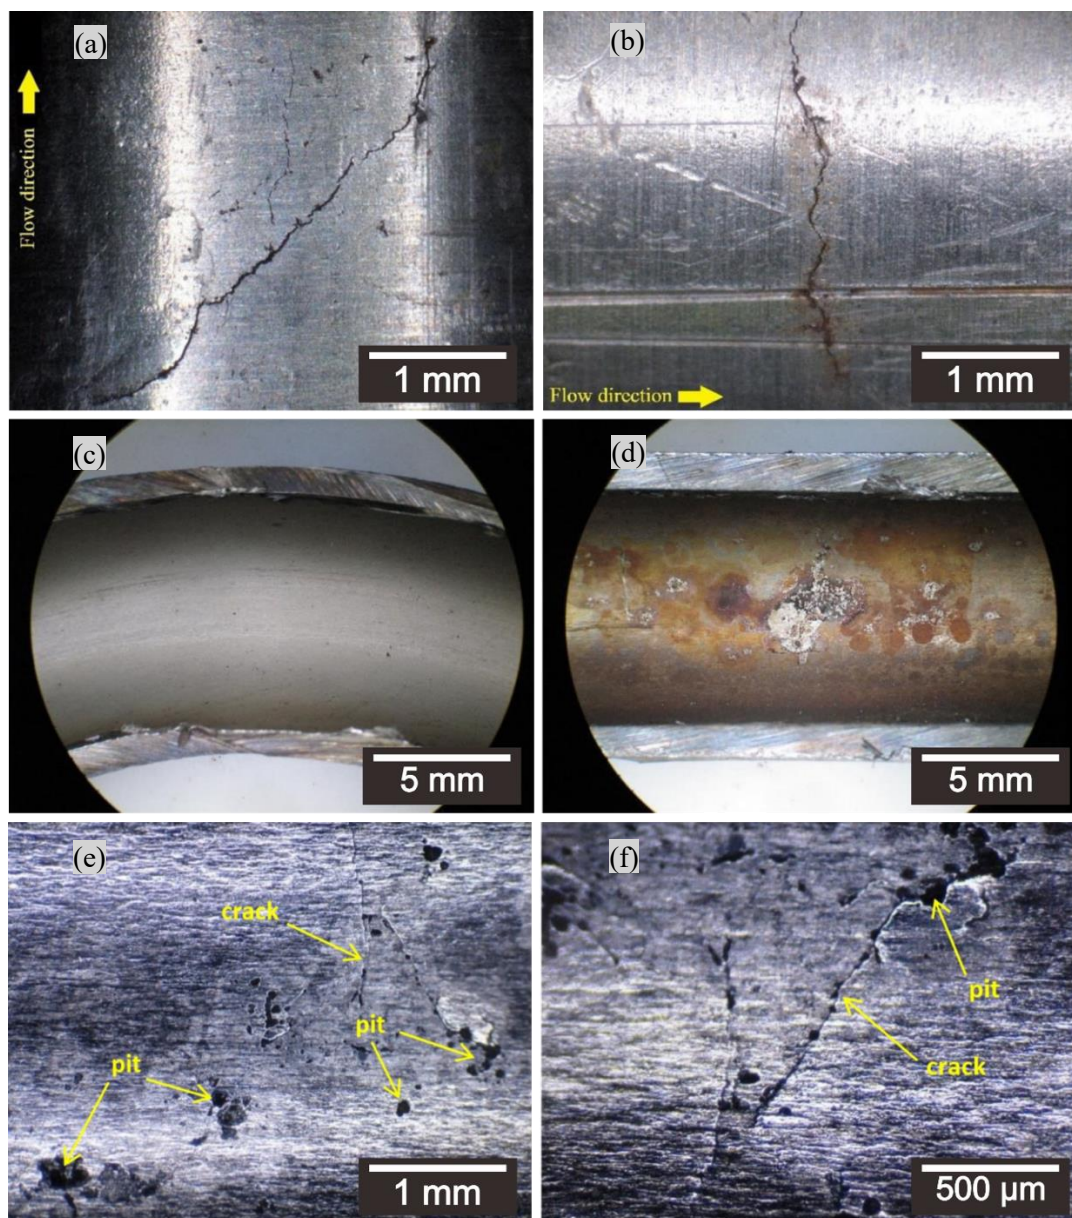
Stereomicroscope macrographs of the failed fuel supply tube showing (a) primary and secondary cracks, (b) a perpendicular crack, (c) a clean bent section, (d) rust at the 6 o'clock position, (e) pitting on the outer surface, and (f) pitting with cracks on the inner surface
